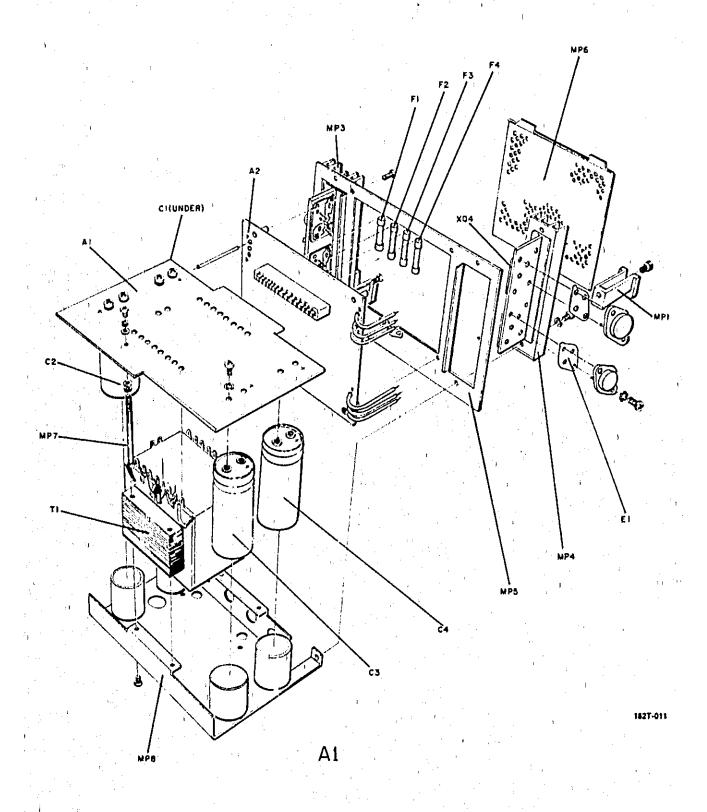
Low Voltage Power Module Exploded View 6-3
